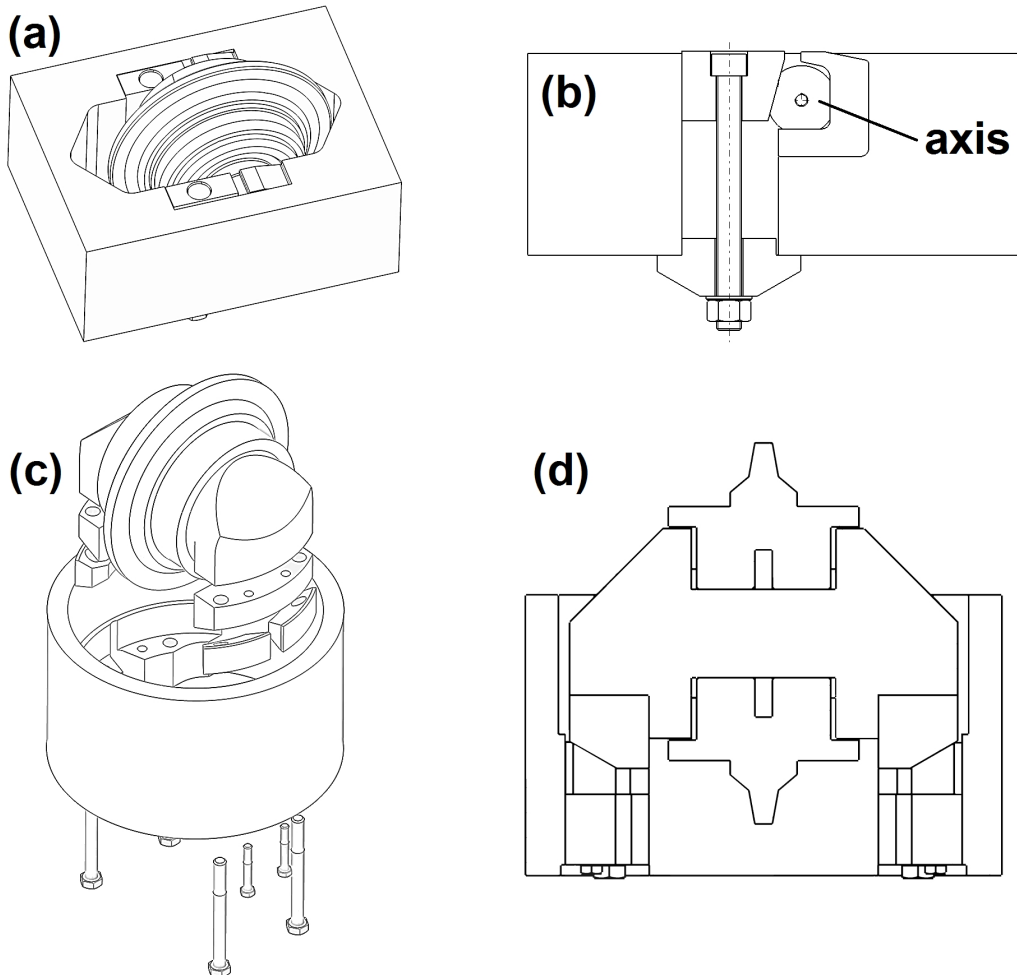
Cutter mounted with a Wedge-Lock system (a), cross-sectional view of Wedge-Lock system (b), explosion drawing of conical saddle / bayonet system (c) and cross-sectional view of mounted cutter (d)
